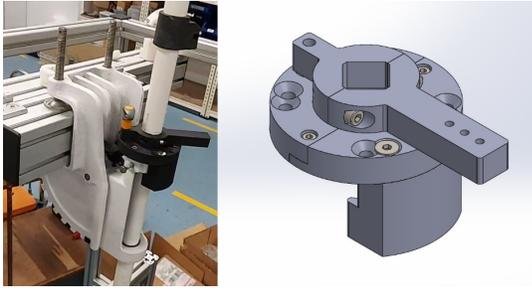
Thruster setup (left) and render of mounting mechanism (right).
